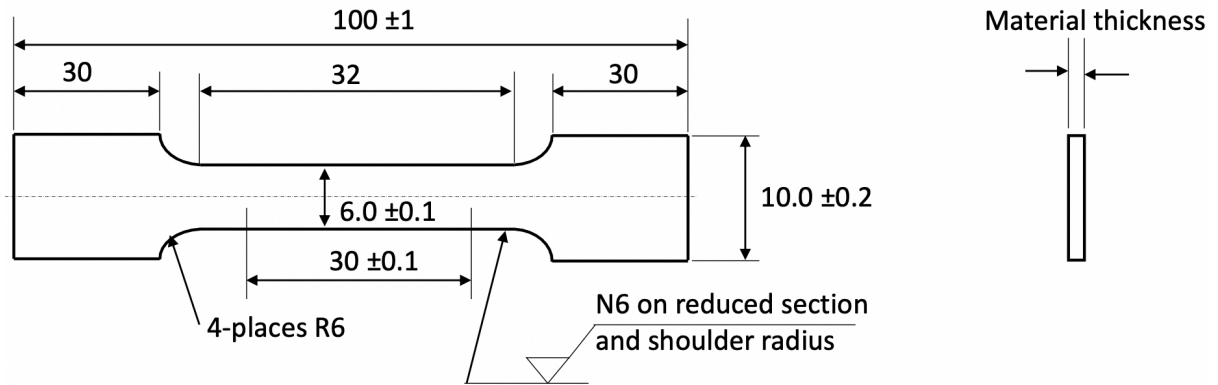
Orthographic drawing showing dimensions of sub-size standard tensile test specimen which are in accordance with ASTM E 8M
